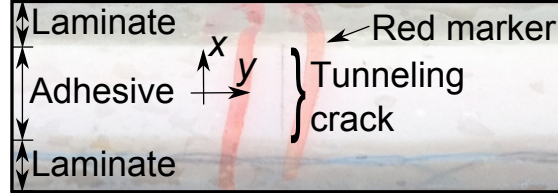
Tunneling crack identified in the trailing-edge joint of a full scale test blade.
